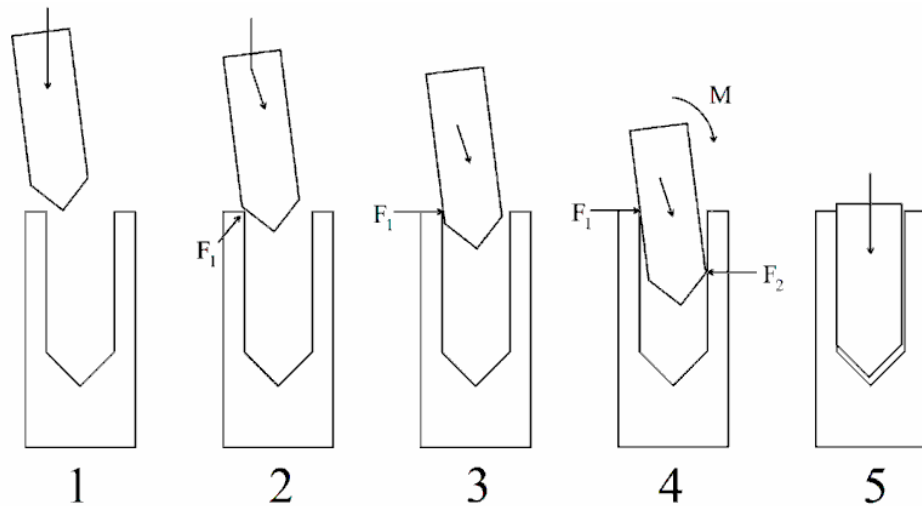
Stages of successful peg and hole assembly. 1 is the approach, 2 is chamfer crossing, 3 is one-point contact, 4 is two-point contact, and 5 is line contact and successful assembly.
